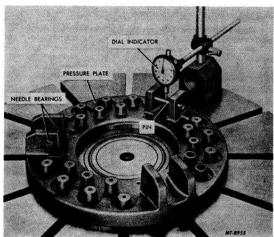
Checking Thickness of Pressure Plate (Dimension "C")
